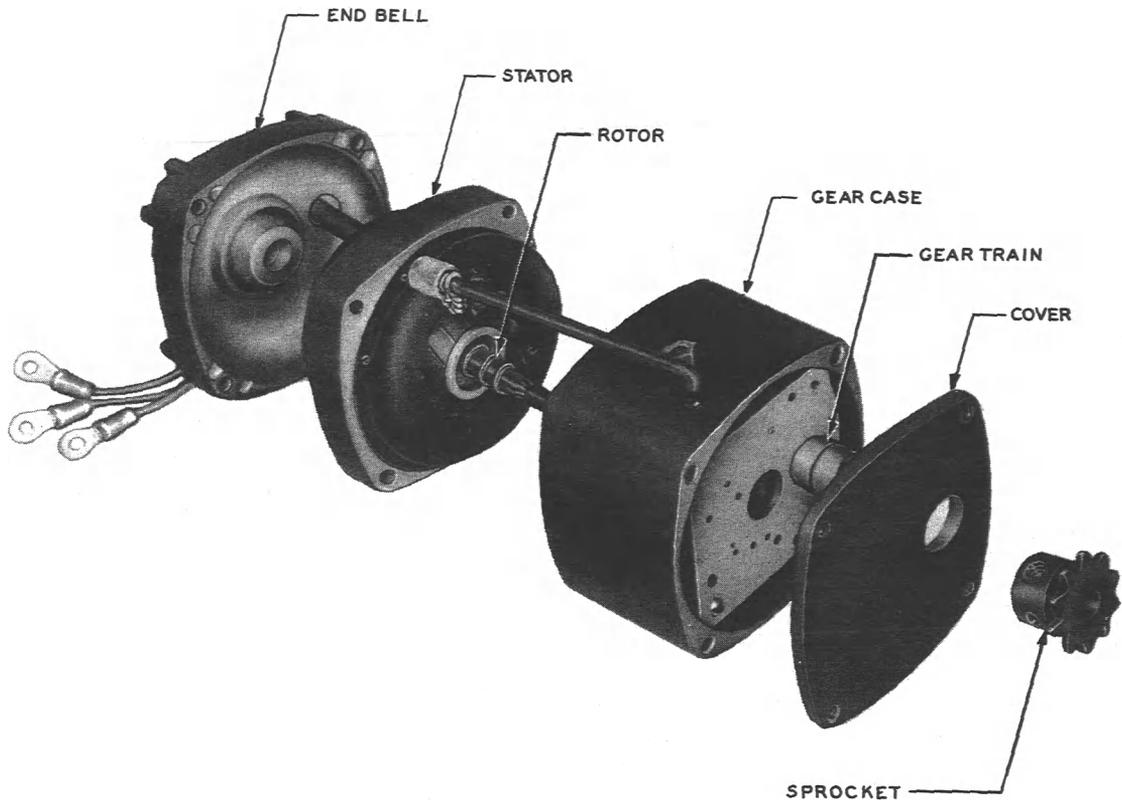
KS-5559, List 5 Gear Motor Parts (Borg)
